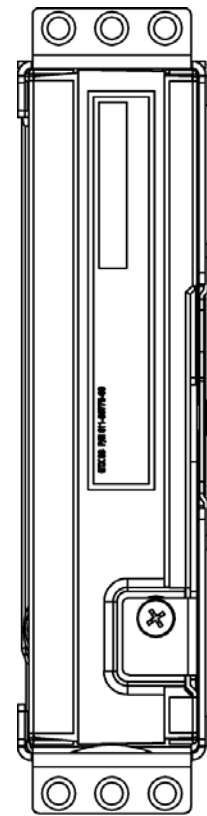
GRS 77 Outline Drawing with Mounting Rack
